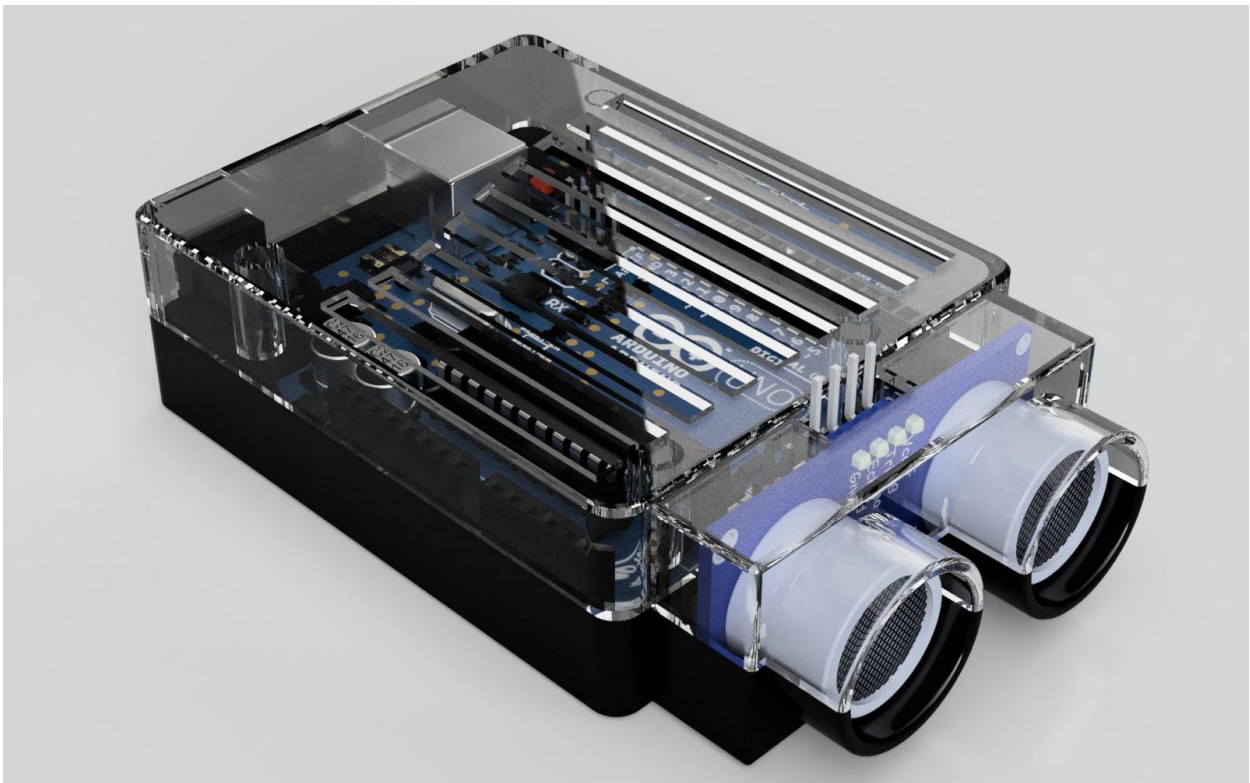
Enclosure design 2 ~ Appearance with cover - Clear
